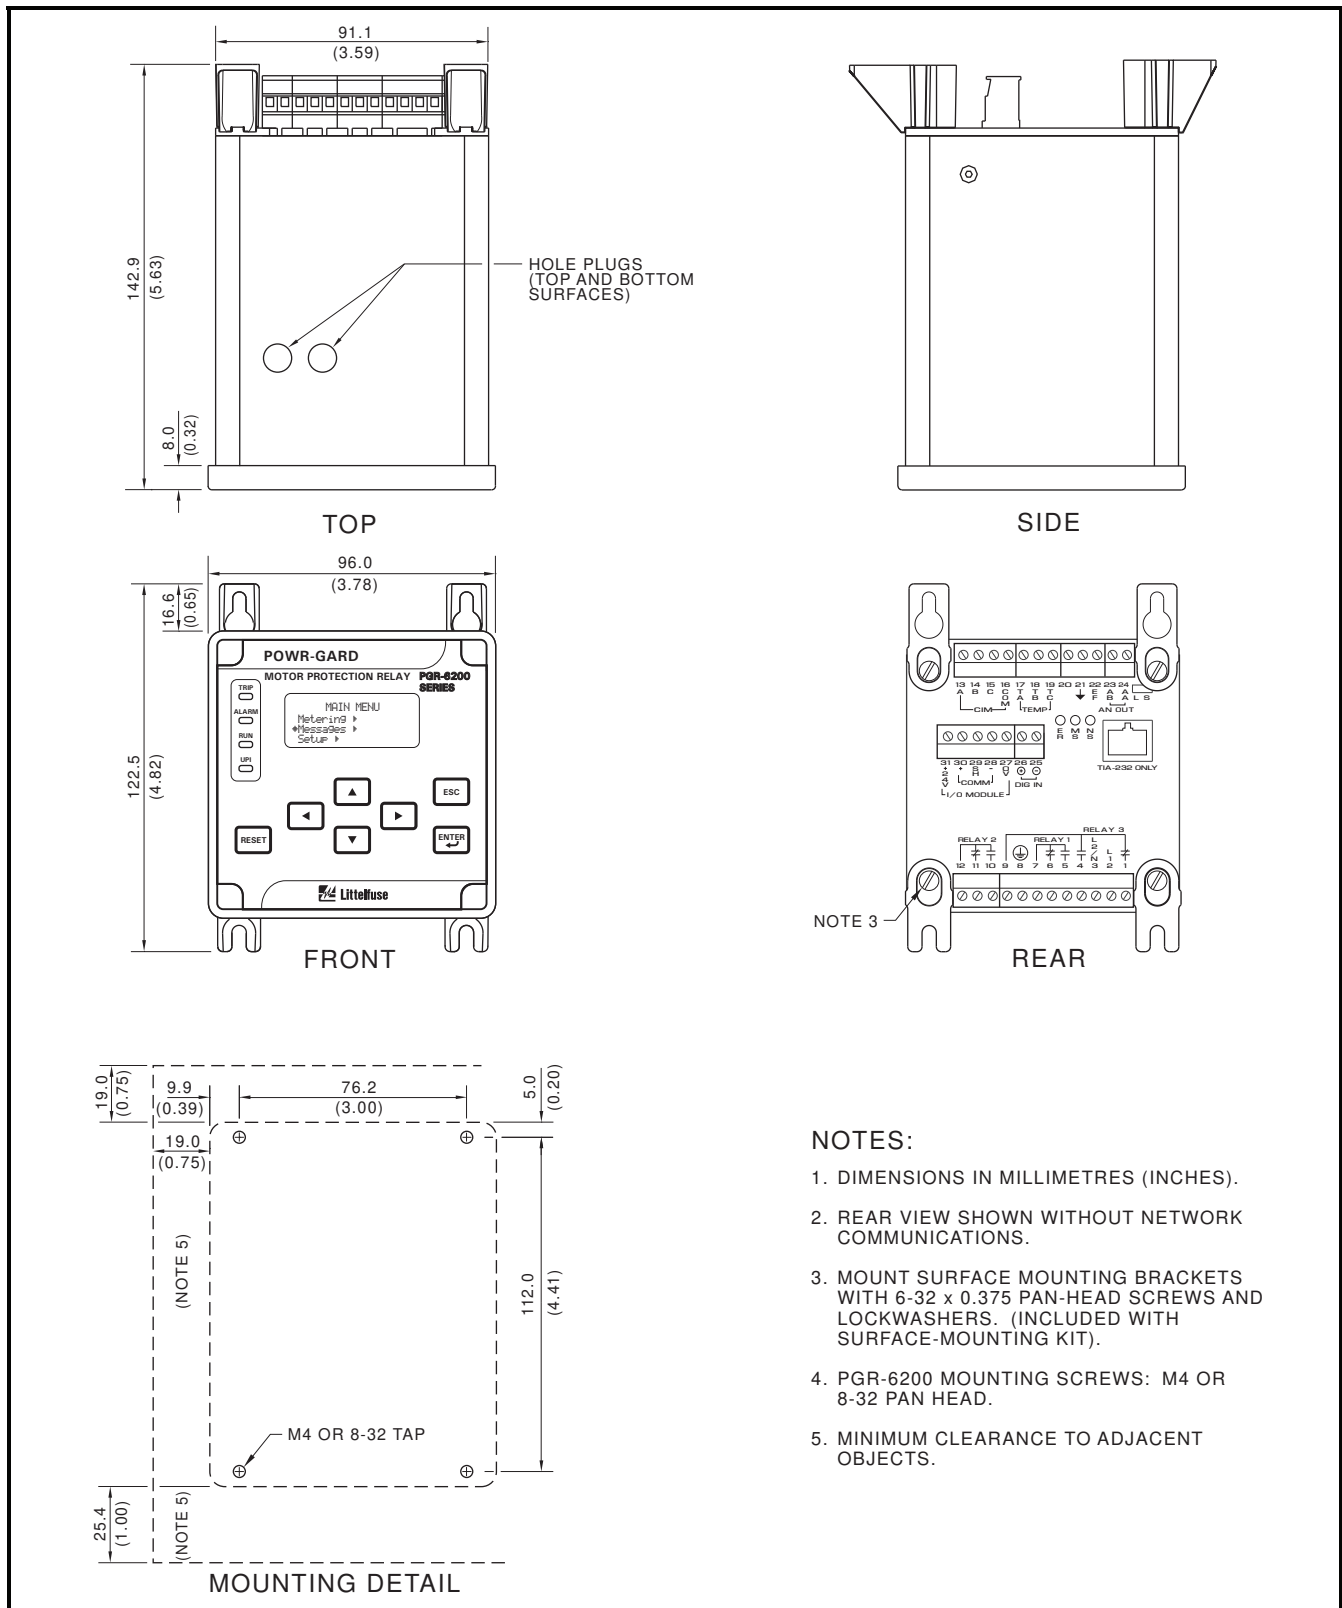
PGR-6200 Outline and Surface-Mounting Details.
